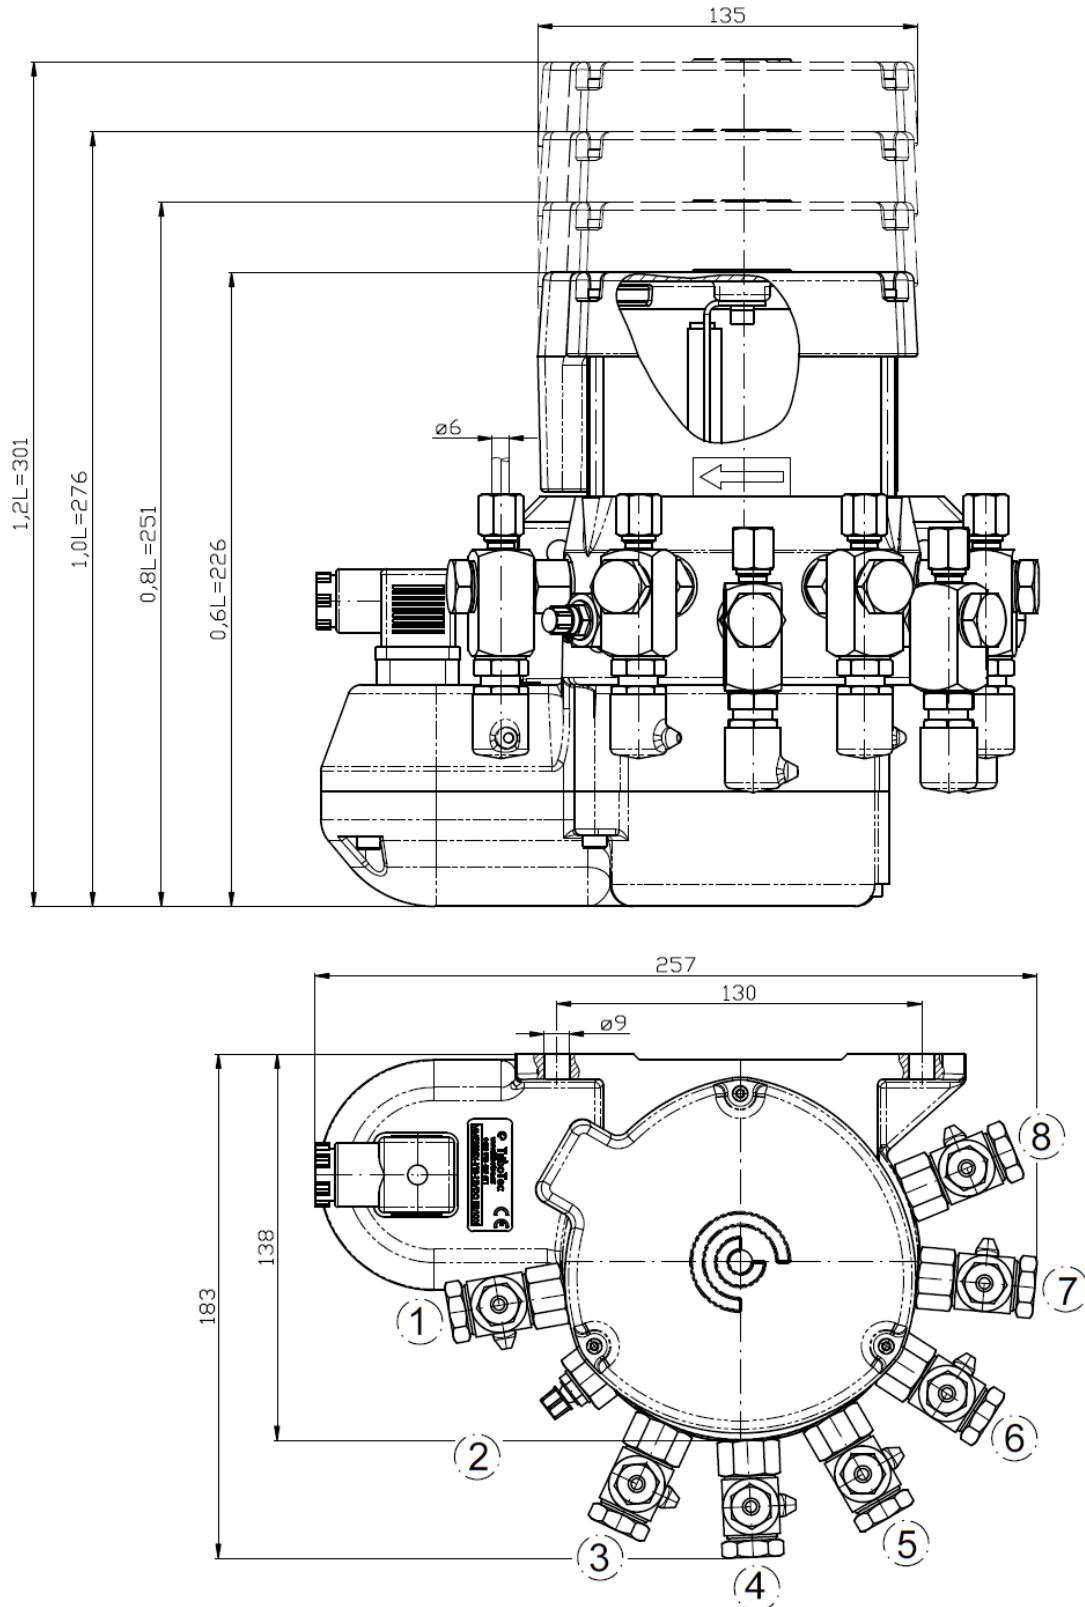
Dimensional drawing of MMP 221-V6A-200 lubrication pump
